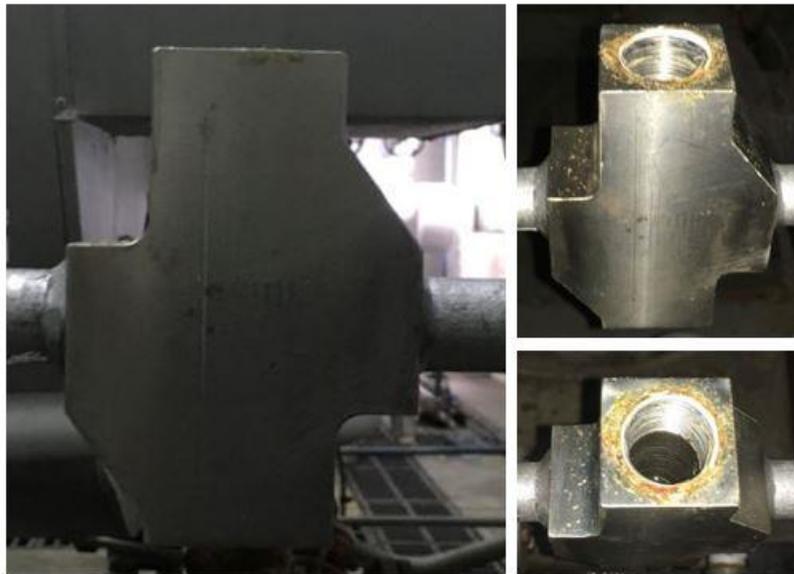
Fabricated Sensor Chamber using ASTM SS 316 Material for this Project
